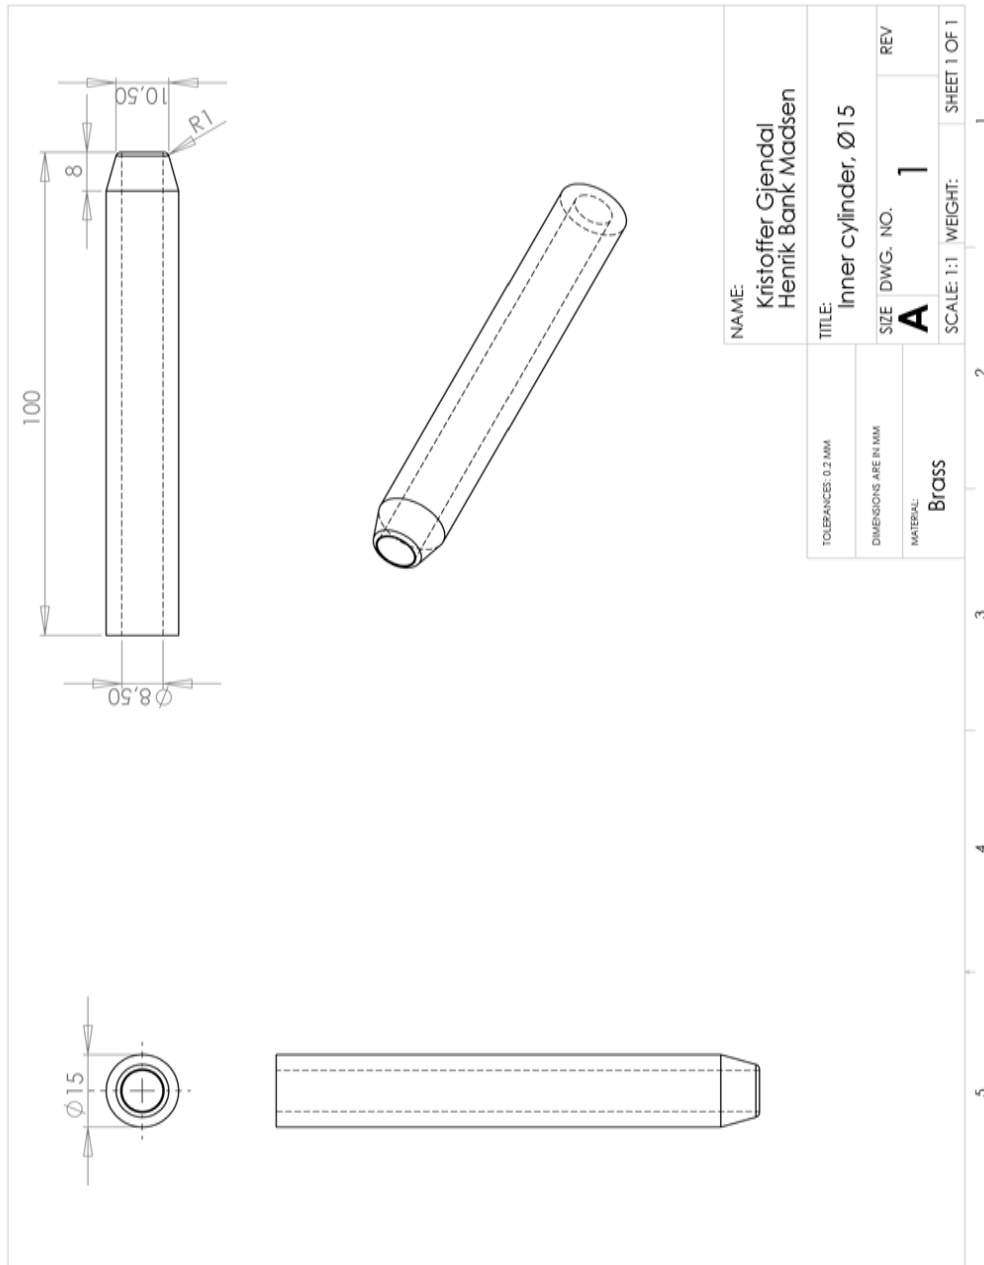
Thin inner cylinder made out of brass used to make the thick-walled monotubes.
